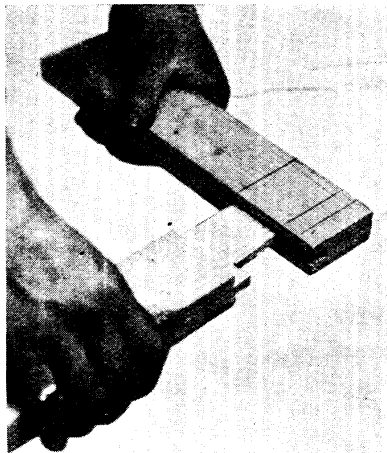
Doors and other parts of the cabinet have haunched mortice and tenon joints at the frame corners. Note the outside marking
